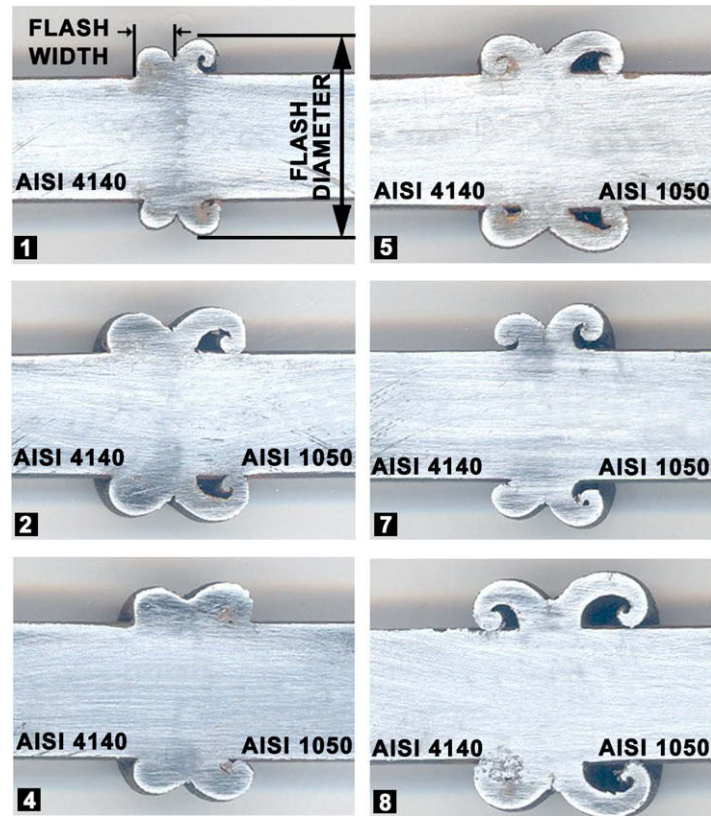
Macro photographs of flashes formed in welded specimens.
